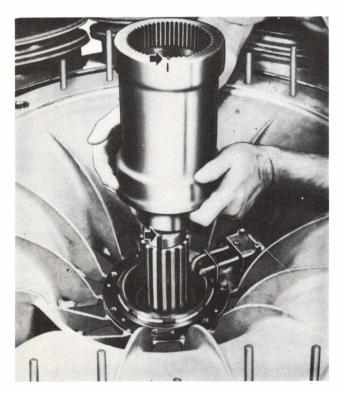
Installing Turbine Coupling on Turbine Shaft
